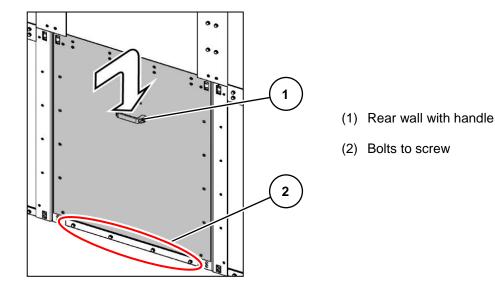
All panel versions except for contactor panels with panel width 435 mm and switch-disconnector panel: Inserting and fixing the rear wall
